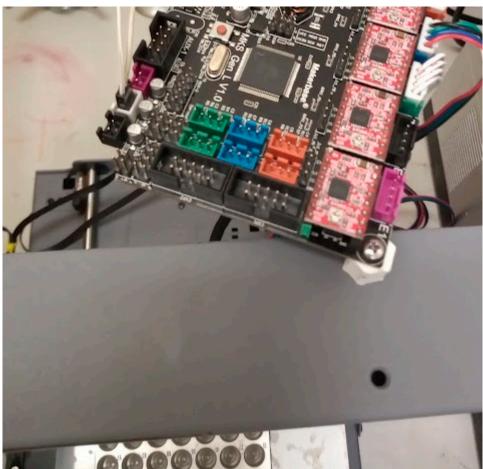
Control board attached to the top of the 3D-printer body using a screw and a spacer.
